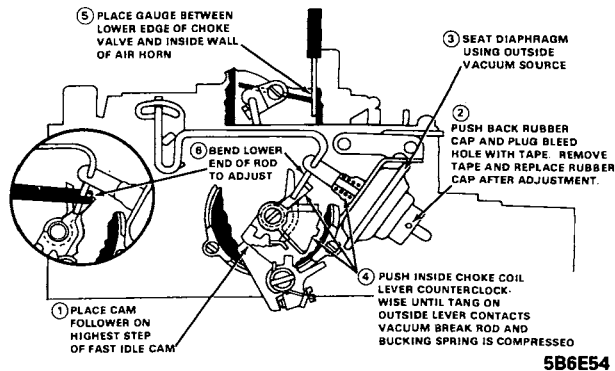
E-54 - Vacuum Break Adjustment Rich Setting
